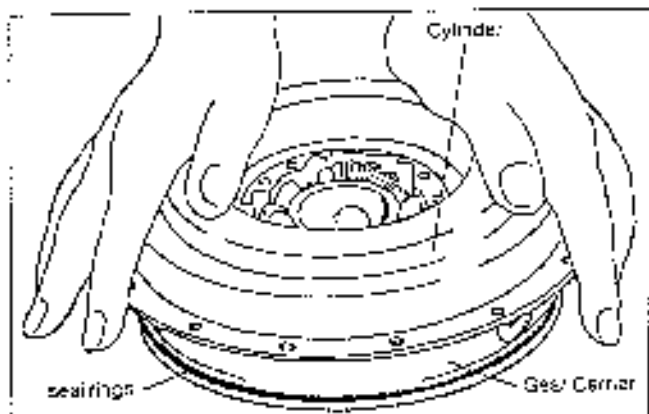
Pressing Cylinder on Bevel Gear Carrier
